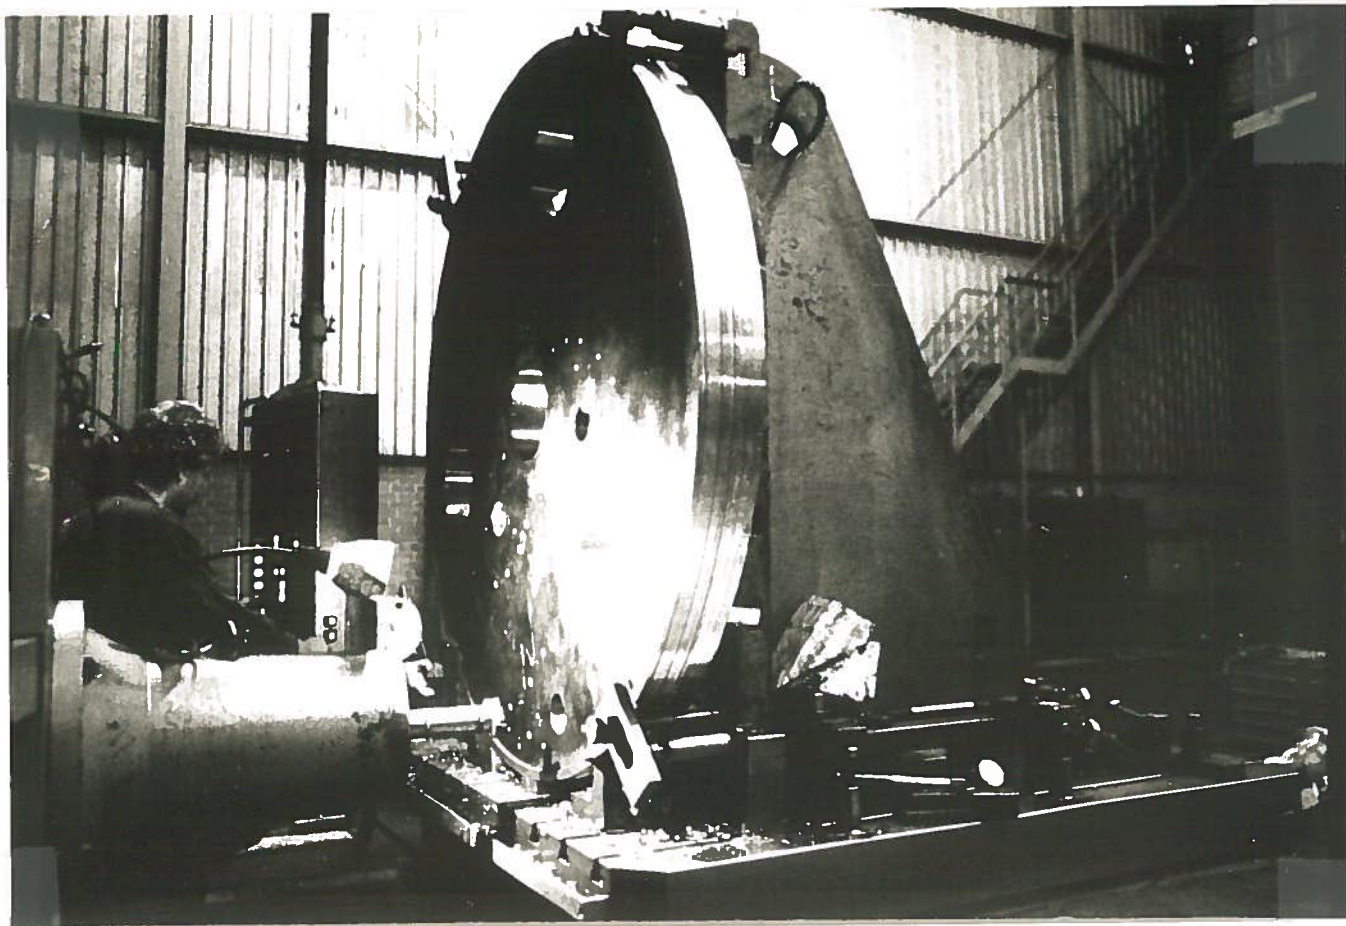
Finishing of the holes on the plate by numerical controlled machine.
